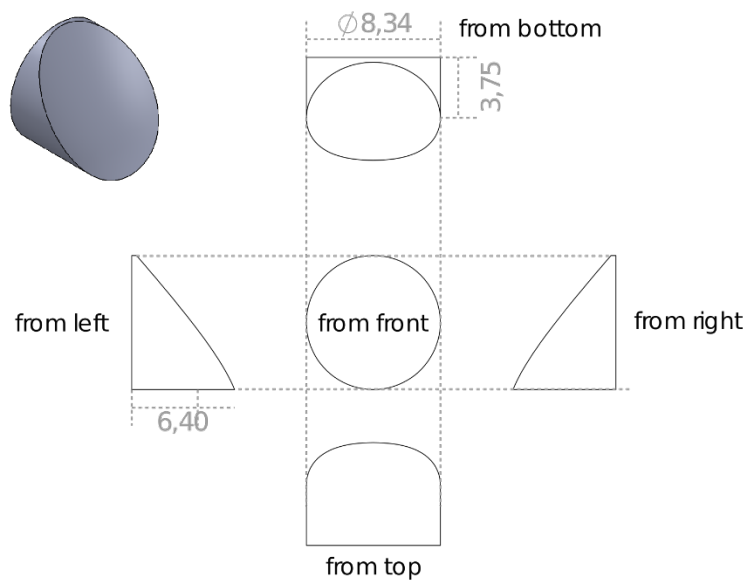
Construction drawing of elliptical mirror eM1. [dimensions in mm]
